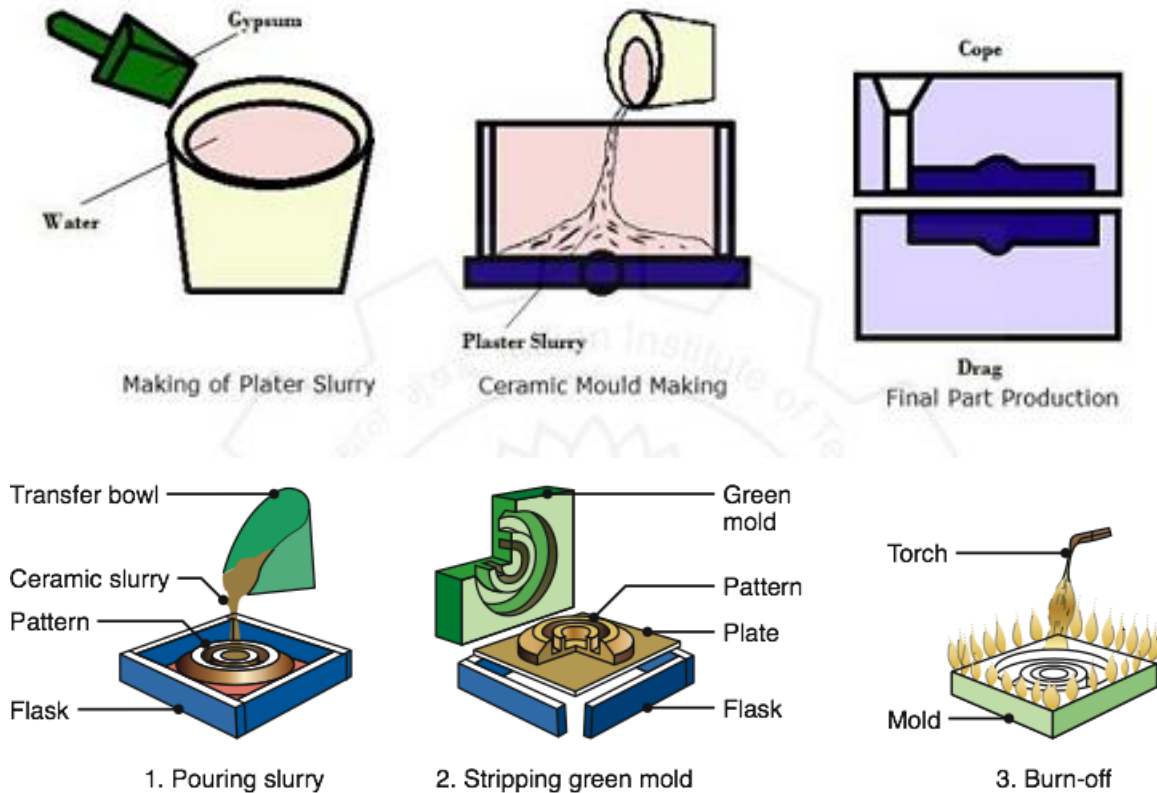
Ceramic Mold Casting Process: Sequence of Operations in Making a Ceramic Mold.
